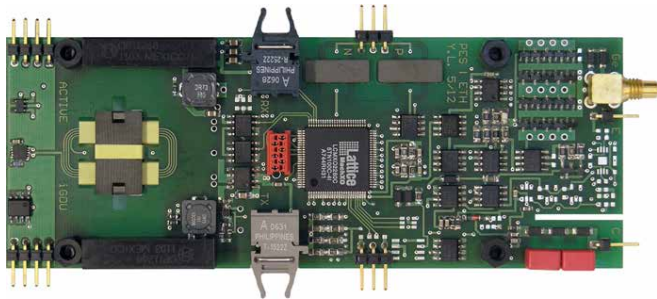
Prototype of the active IGBT gate drive; PCB dimensions: 50 mm x 133.3 mm and/or 1.97 in x 5.25 in
